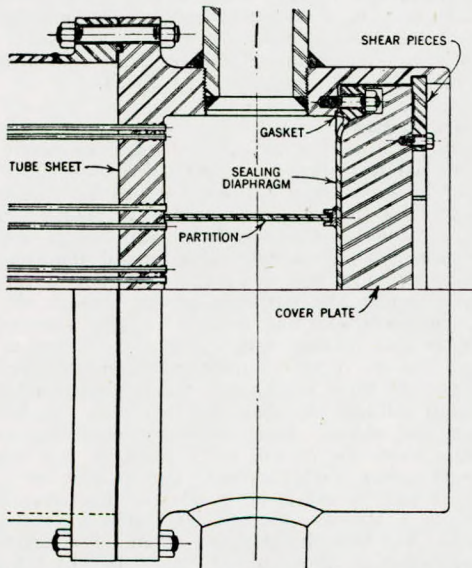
Section of Lockhead showing flexible diaphragm transmitting pressure load to head plate.
